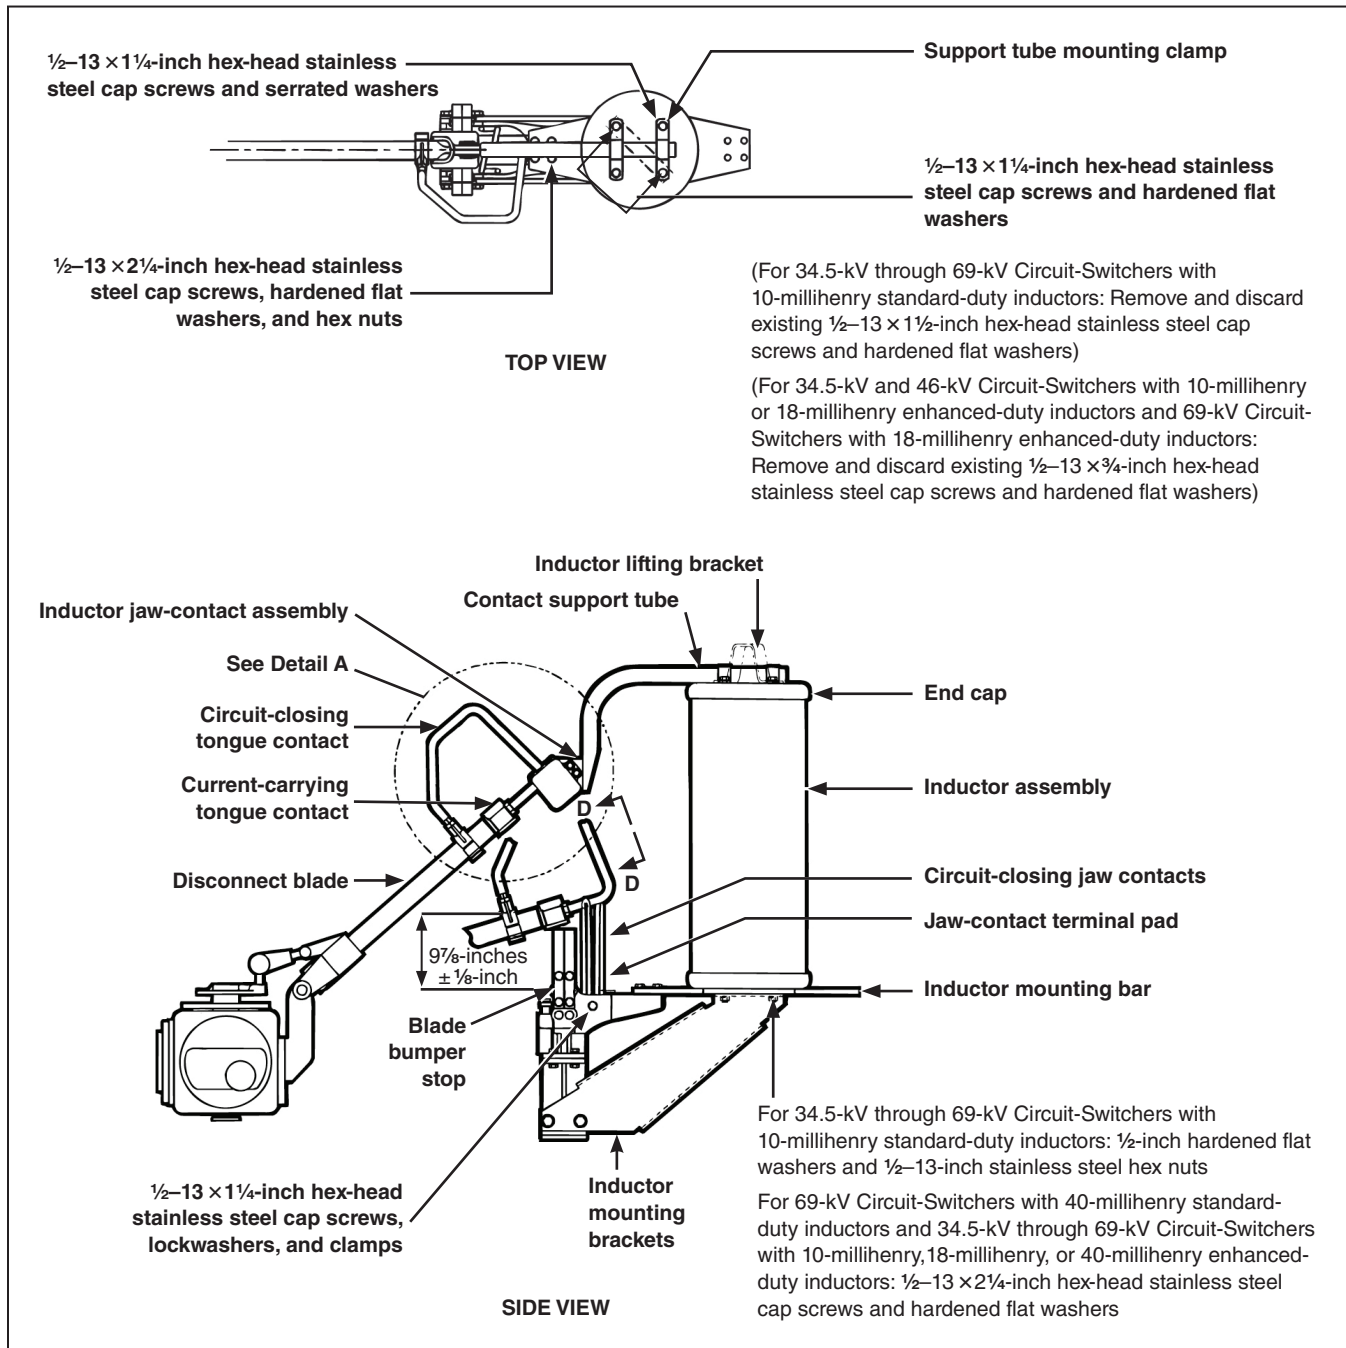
Assembly details of pre-insertion inductors for 34.5-kV through 69-kV vertical-break style and integer-style circuit-switchers. 10-millihenry inductors illustrated.
